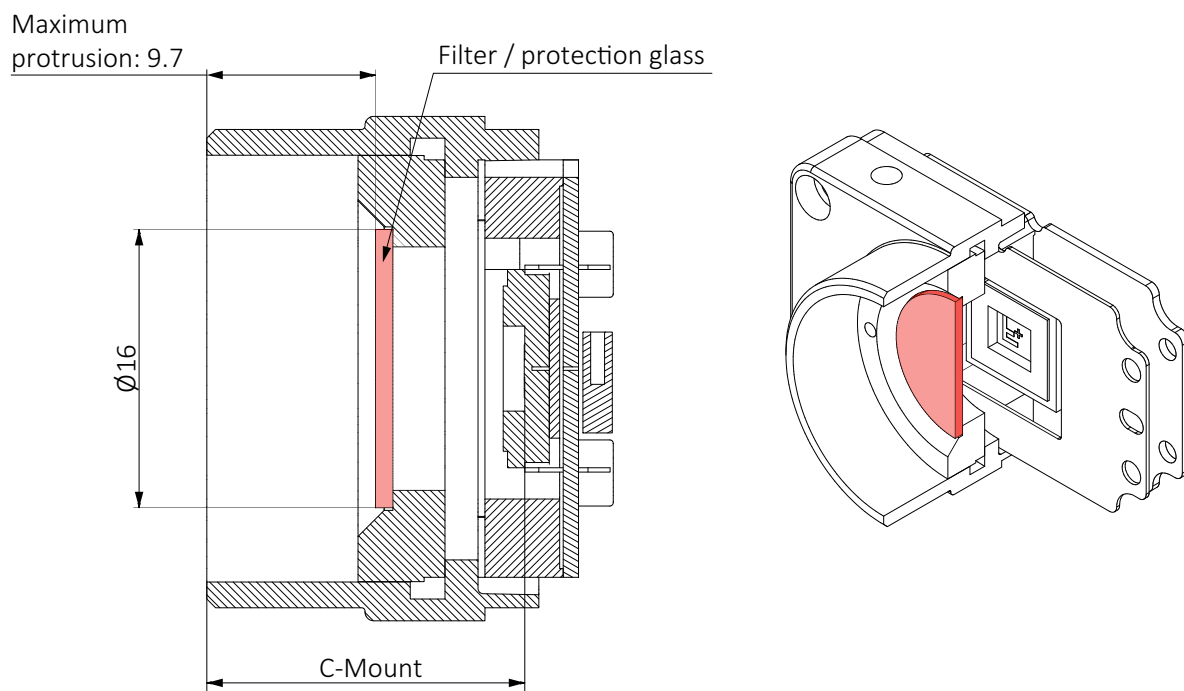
Manta type A C-Mount dimensions (16 mm filter)
